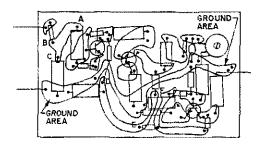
Top, or component side, of a typical circuit board. A full-size scale drawing of the component layout is transferred to the board by tracing over carbon paper. The irregularly shaped areas embrace terminals that are to be connected together. For example, in wiring up the board, terminals A, B, and C will be connected together; similarly, terminals D, E, and F will be connected together. The long narrow area weaving through the approximate center of the board includes all ground connections.
